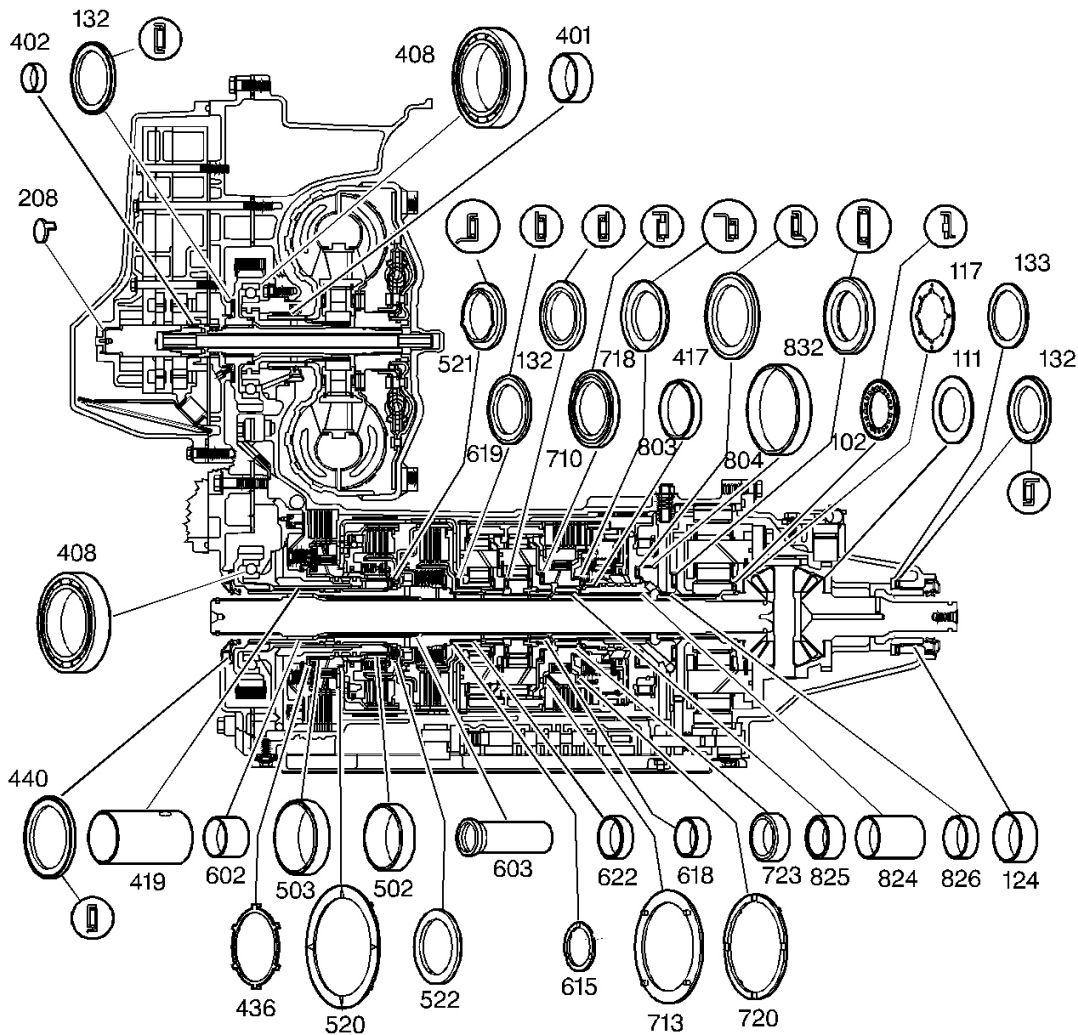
Transaxle Bushings, Bearings and Washers Components
